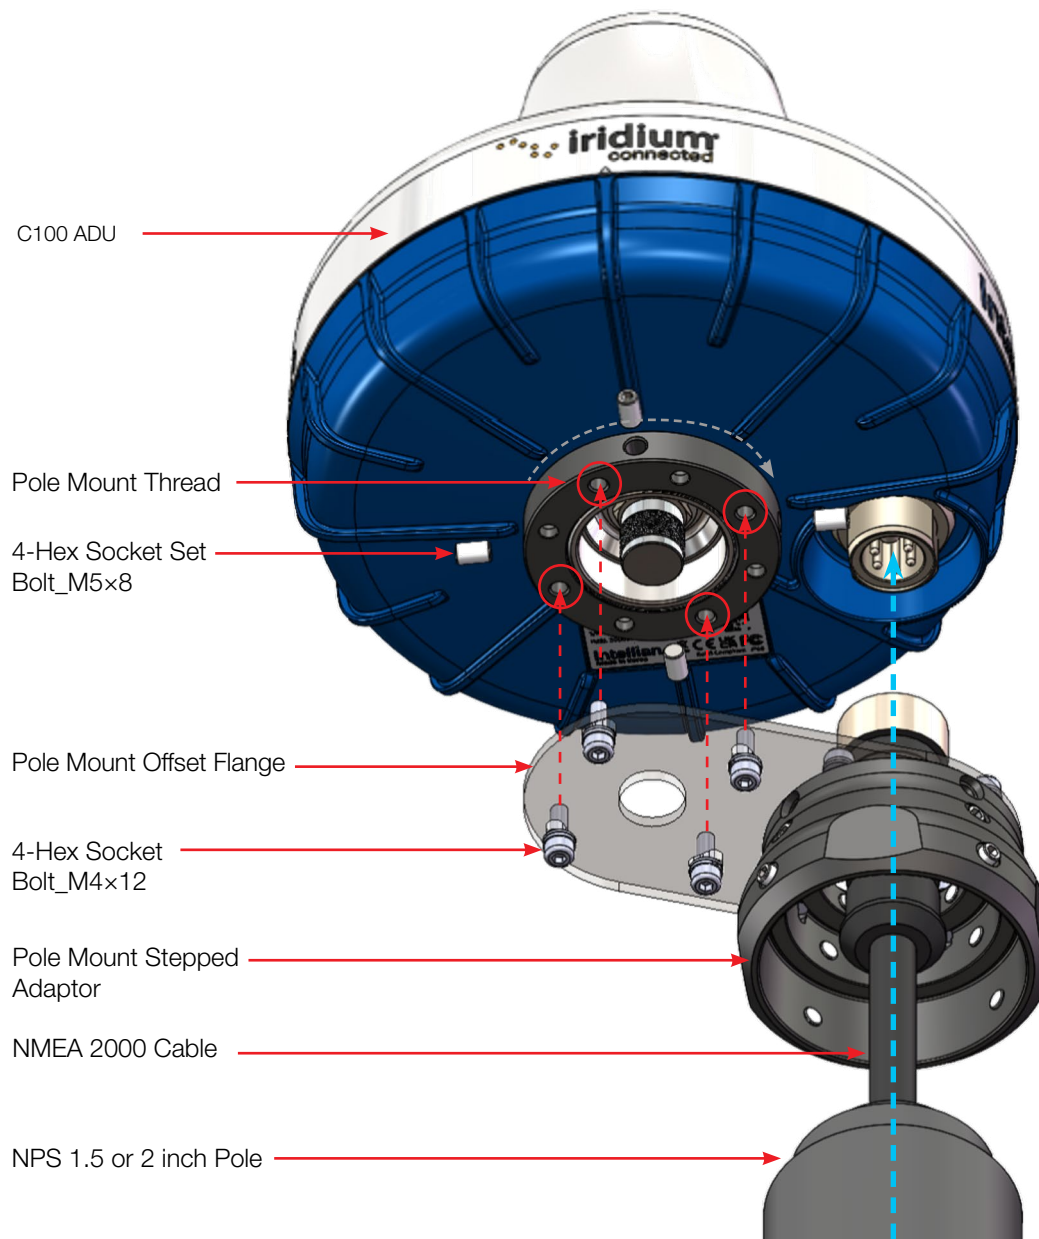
Offset Mounting with Internal NMEA 2000 Cable Installation
